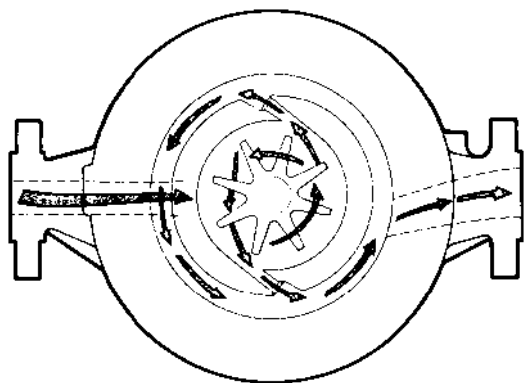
A straight-radial-vane impeller in a double-emission-point, conical-diffuser circular casing (Sundyne Corporation)
